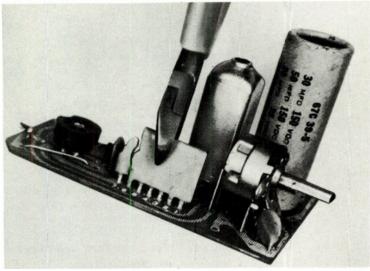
Removing a component section from a printed-circuit board. The component section is a subassembly and may consist of a complete circuit in itself. The component section is mounted on the main printed-circuit board in the same way as a single component, such as a volume control or an if transformer.
